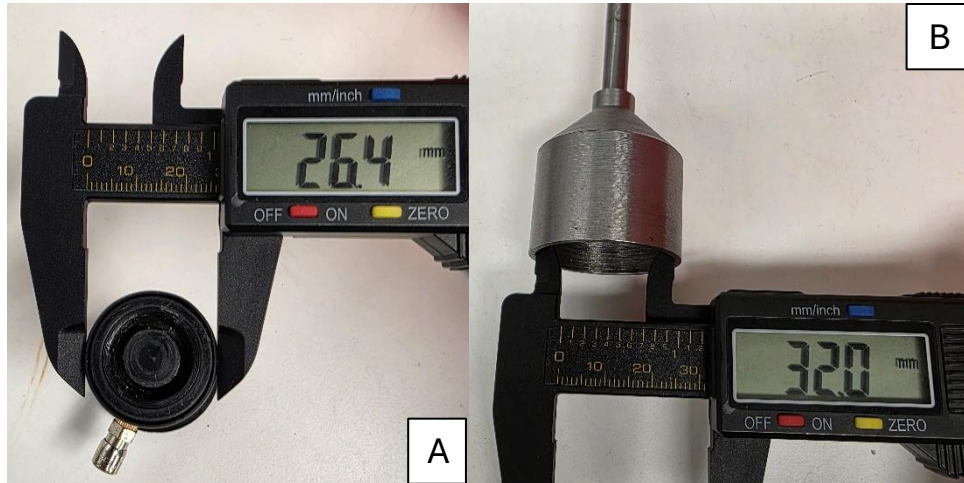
A) Toolhead and B) aperture cutter, and their major dimensions
